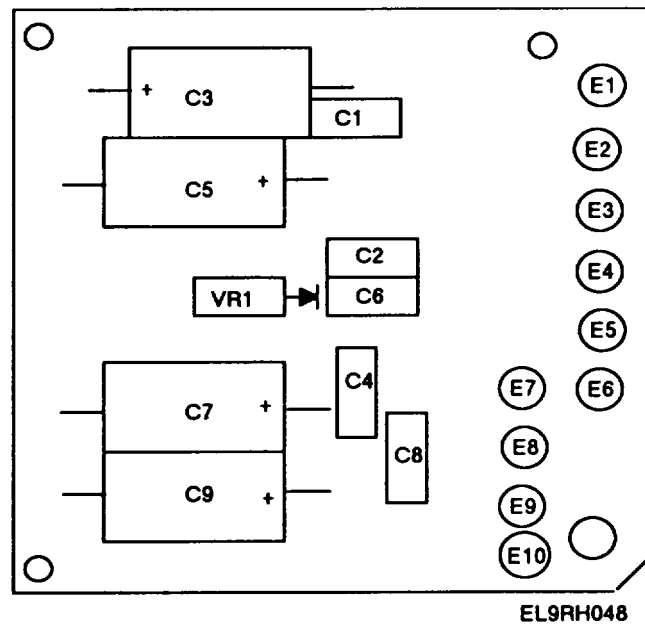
Power Supply-Module Assembly A3013338-1 (Sheet 3 of 6)
